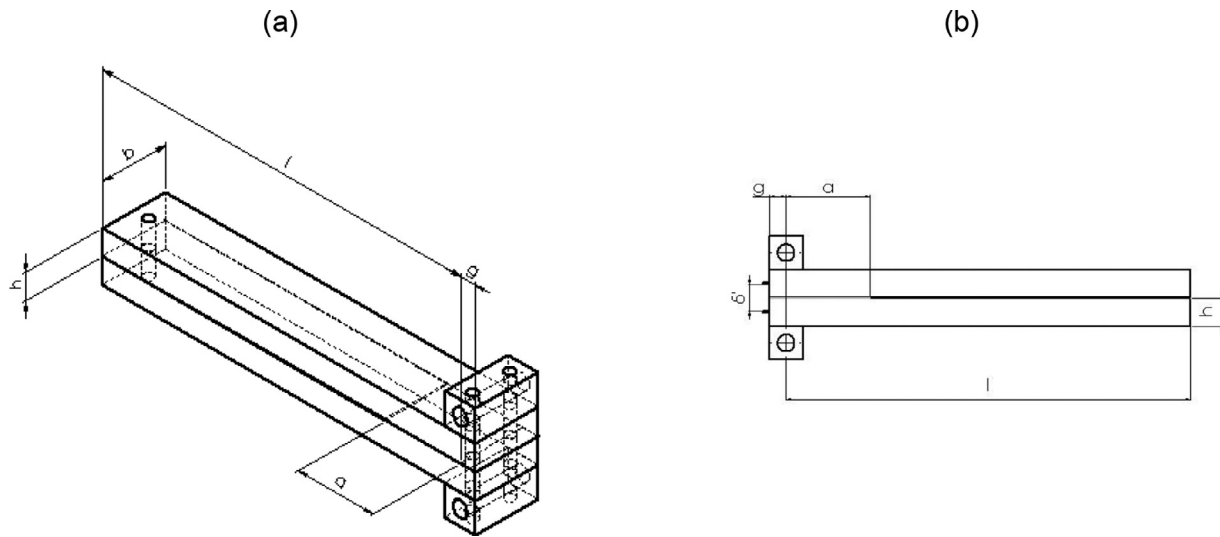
DCB structure scheme: (a) 3-dimensional view and (b) side view.
